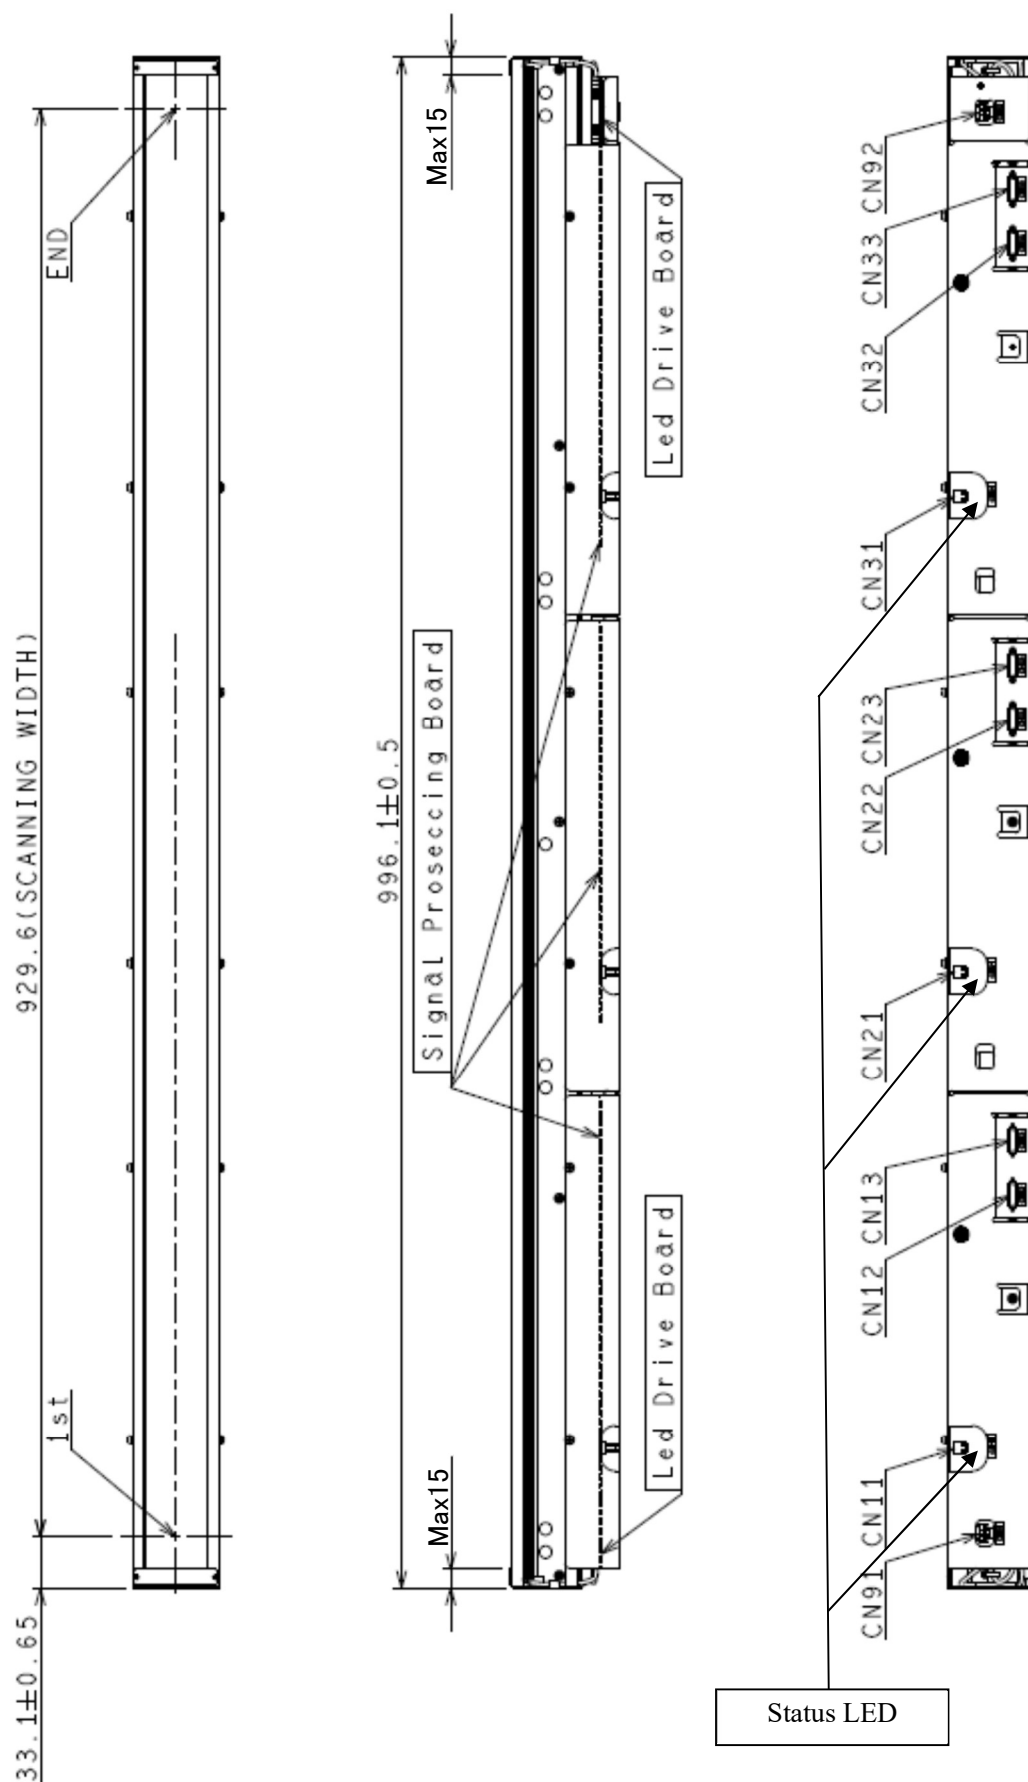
KD6R926AX4 Outline drawing (at 24°C)
